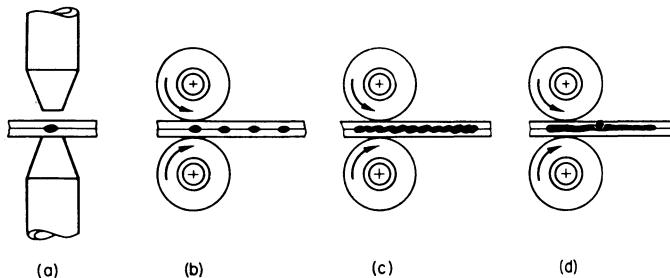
Resistance welding: (a) spot weld; (b) roll spot weld; (c) overlapping seam weld; (d) continuous seam weld
